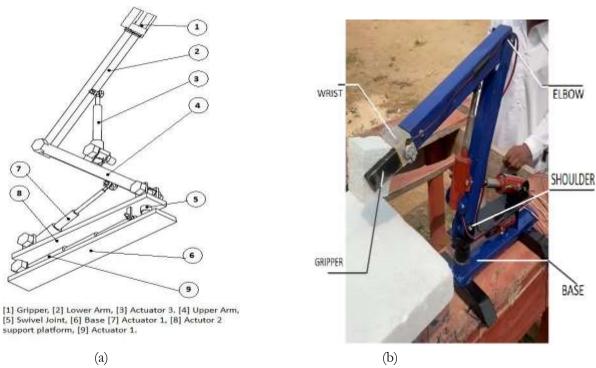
The Manipulator (a) Assembly drawing, (b) Manipulator during demonstration (Source: The authors)
